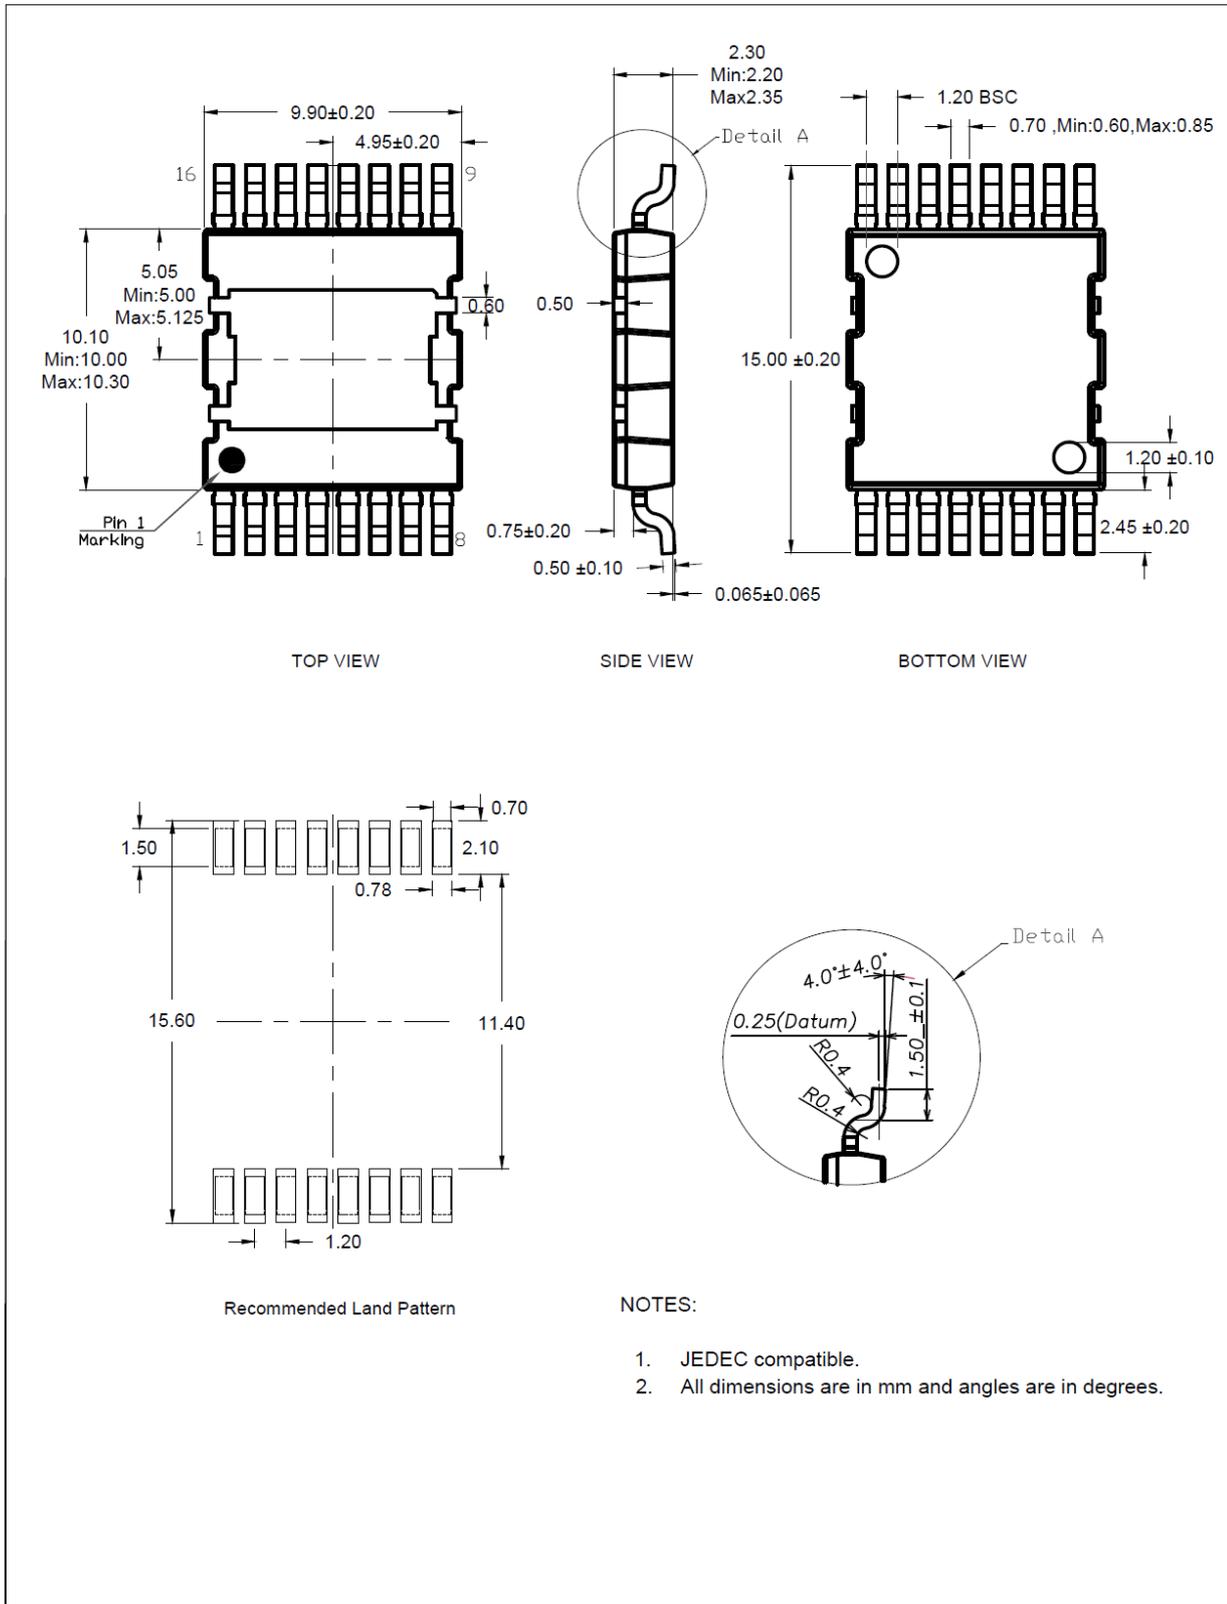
Package Outline Drawing – 16-TOLT 10.1 × 9.9 × 2.3 mm Body
